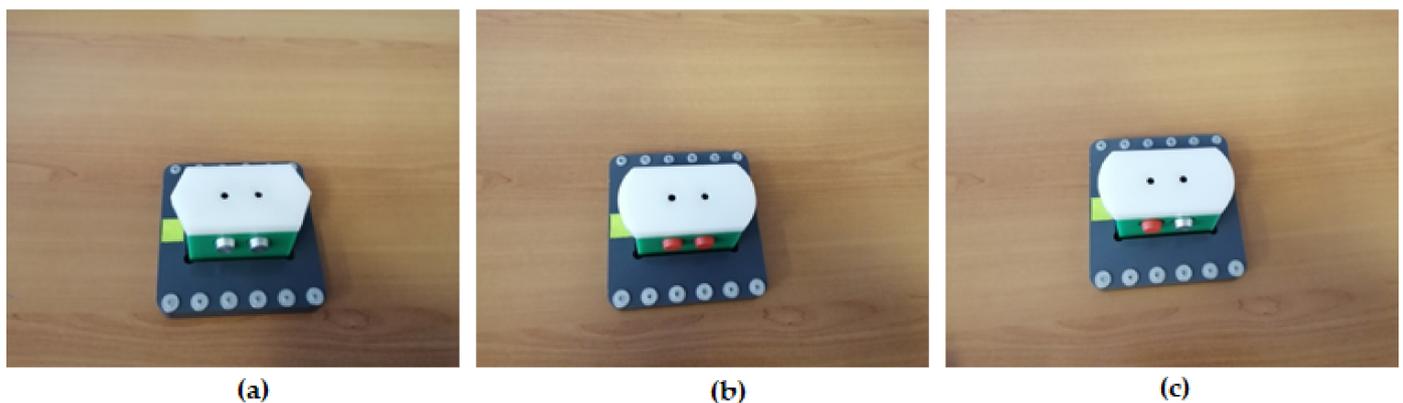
Assembled workpieces: (a) workpiece with metal cylinders; (b) workpiece with plastic cylinders; (c) workpiece with different material cylinders.
